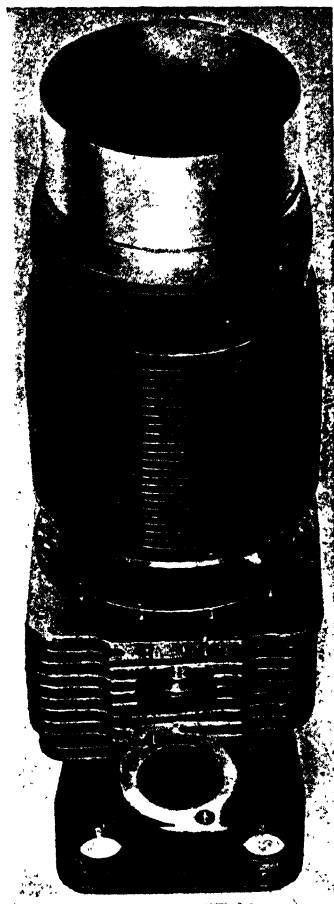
By courtesy of Blackburn Aircraft Ltd.
